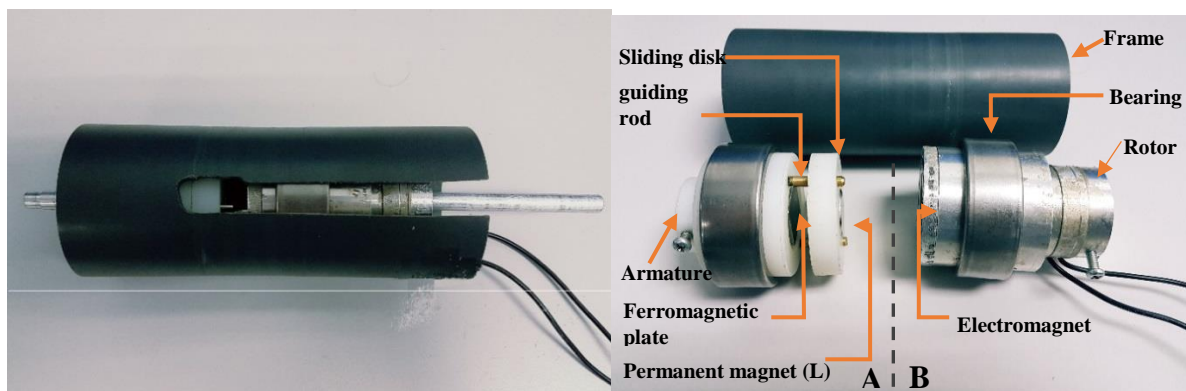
Cross sectional view of the proposed clutch design.
